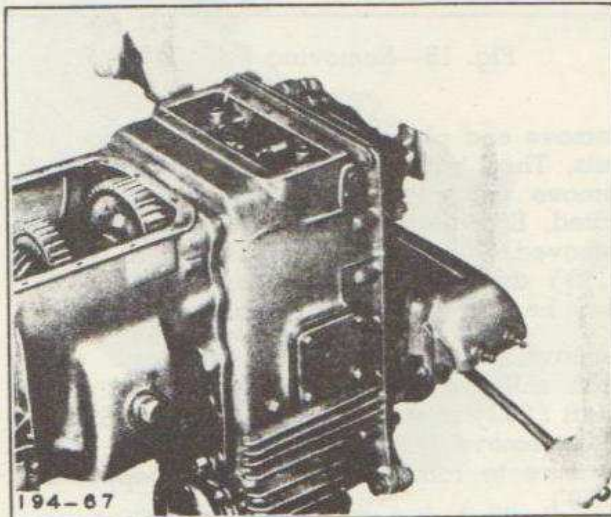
Removing Rear Drive Shaft Flange Nut
